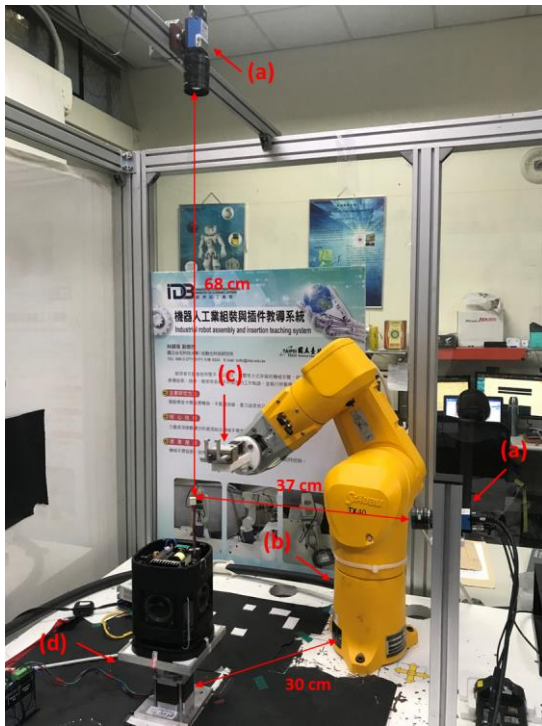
Hardware installation: (a) vision system, (b) robotic manipulator, (c) gripper, and (d) rotating table
